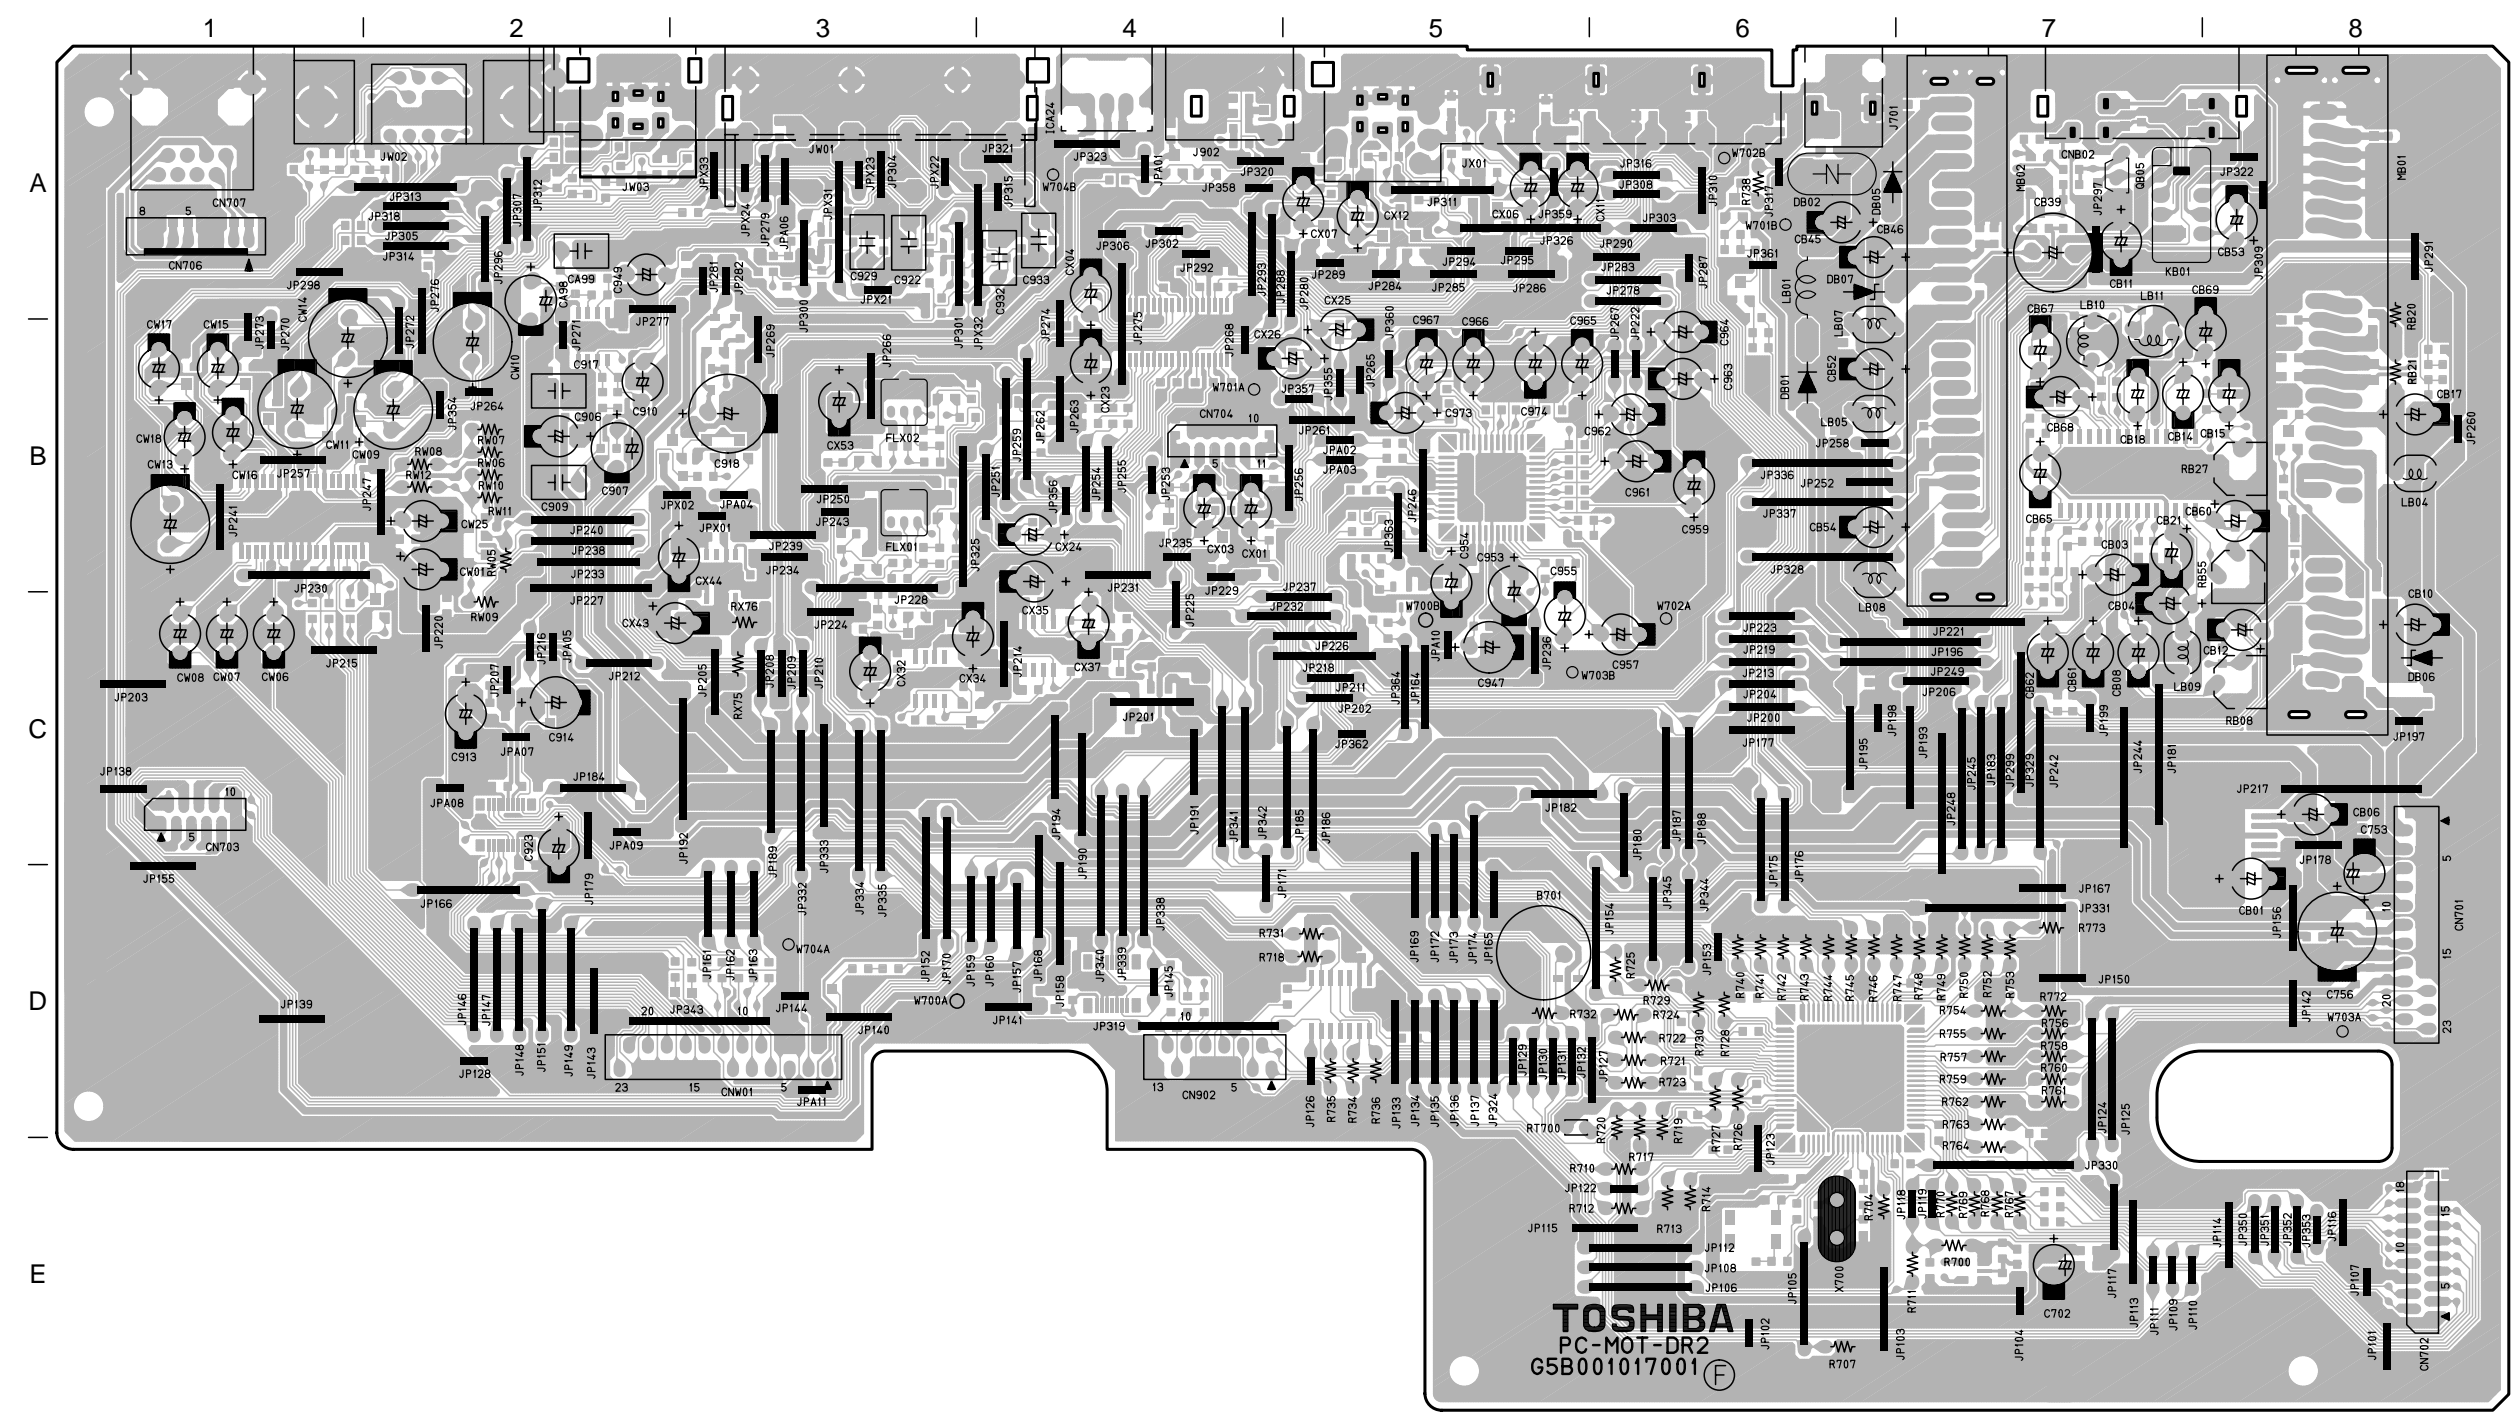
EU05 Mother PC Board (Top side)
